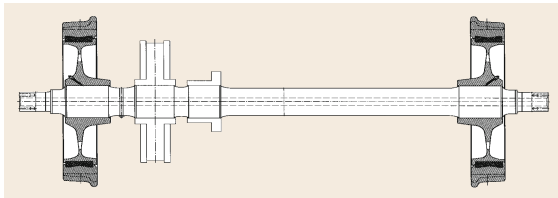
Driven wheelset with brake disk from the Vienna Metro, rubber sprung wheels of type B054, wheel diameter 840 mm new, gauge 1435 mm, weight 852 kg, wheel stiffness 75 kN/mm radial and 8 kN/mm axial (Bochumer Verein, BVV, Bochum)
